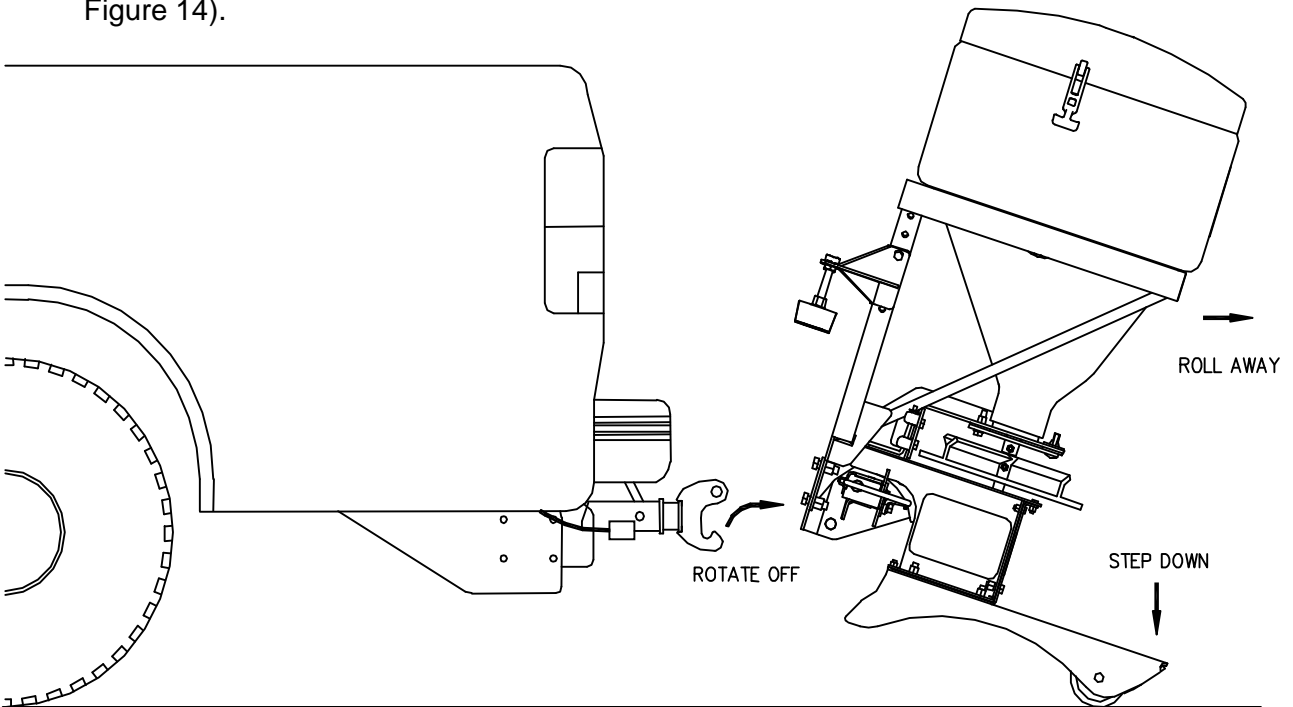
Spreader Detachment Procedure (RT3 Option Kit Installed)
